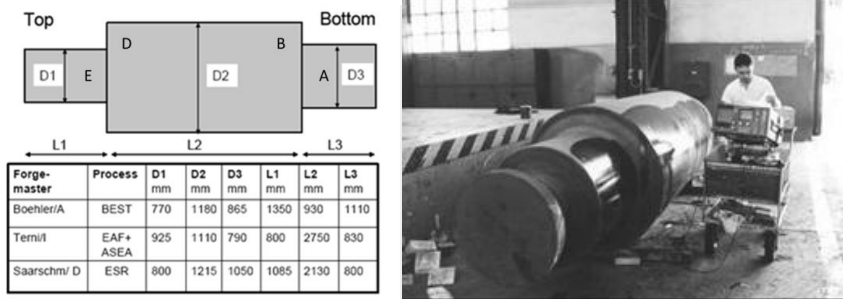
COST trial rotor forgings (type FB2) dimensions [9]; SdF rotor during US NDT control.
